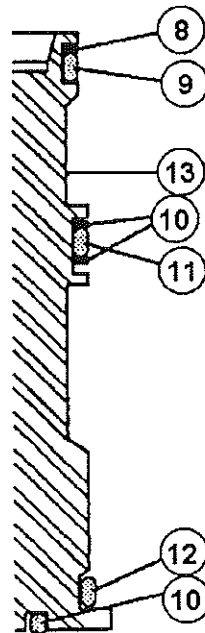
BRAKE PEDAL VALVE ASSEMBLY - CONTINUED
